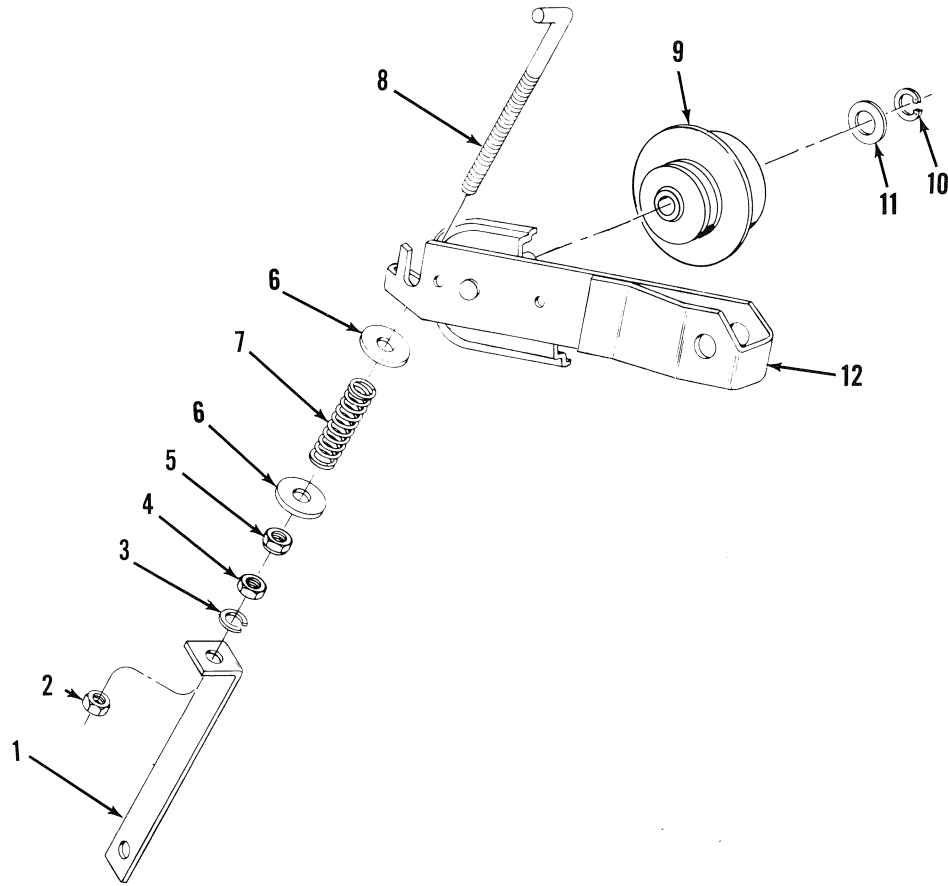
TAKEUP CLUTCH ARM COMPLETE
